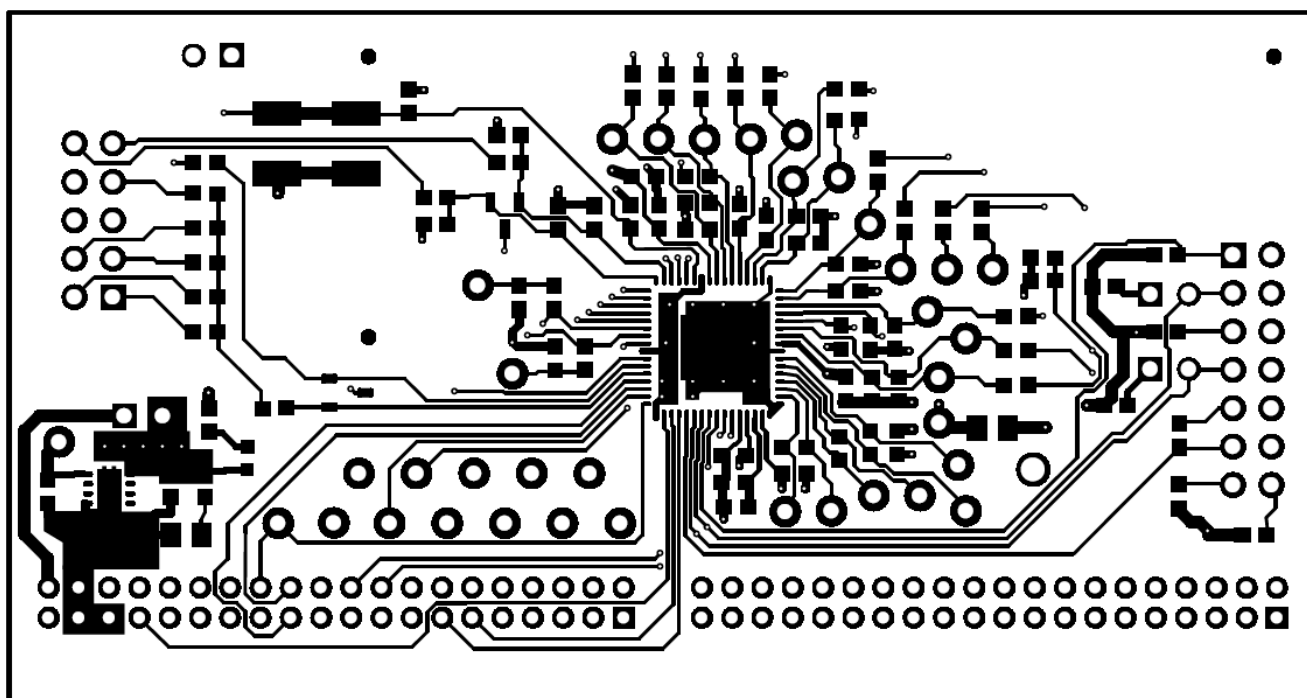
UCD3138064AEVM149 Top Copper (Top View)
